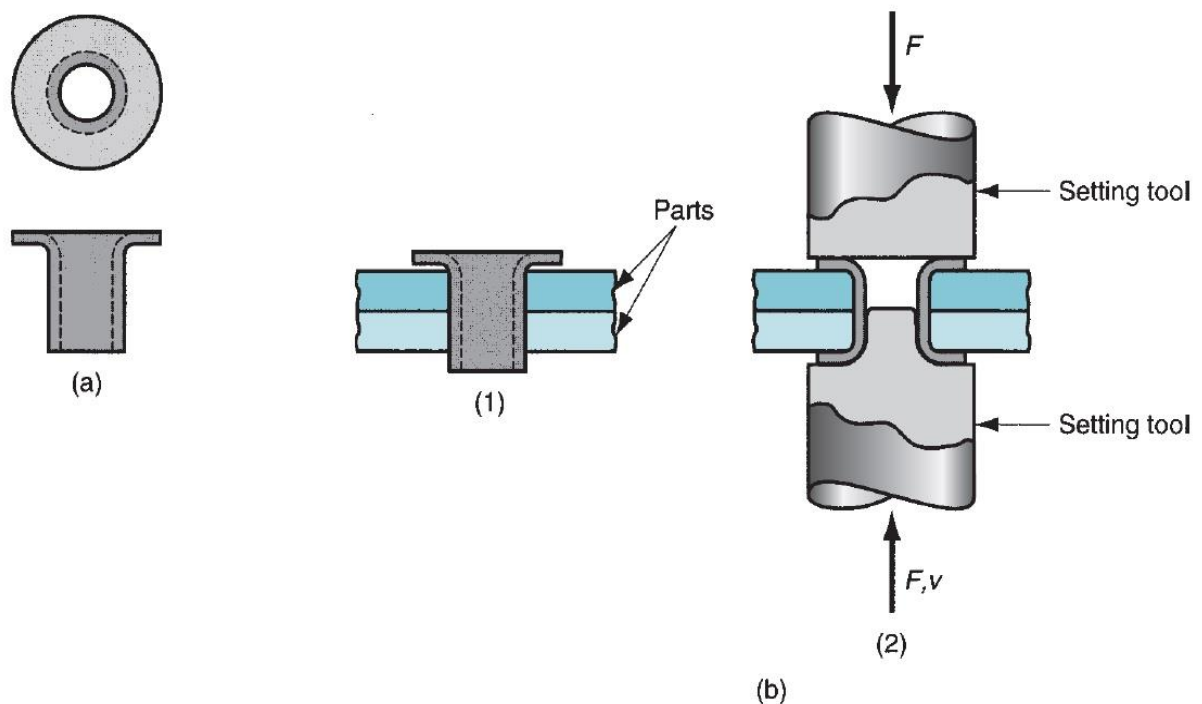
Fastening with an eyelet: (a) the eyelet, and (b) assembly sequence: (1) inserting the eyelet through the hole and (2) setting operation.
